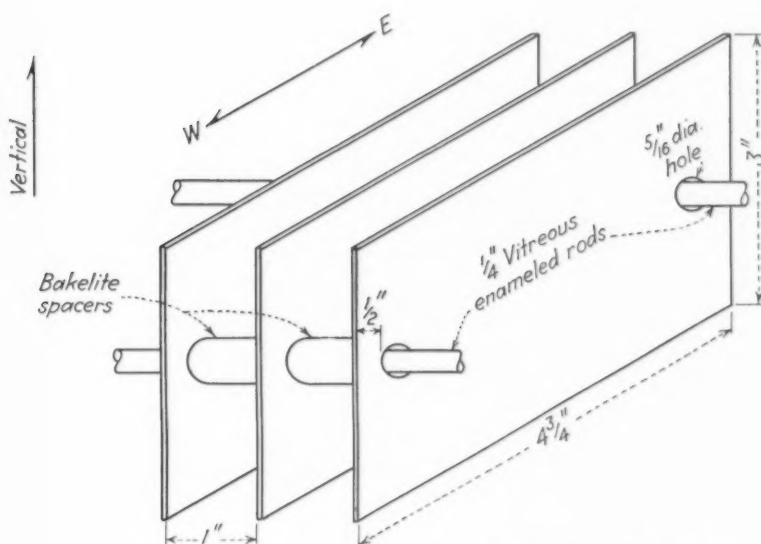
Method of supporting atmospheric corrosion specimens.
